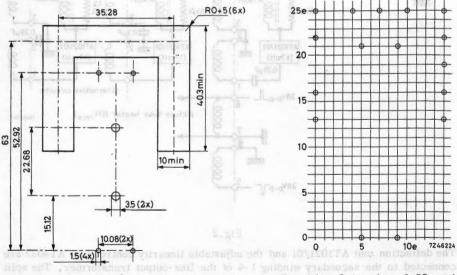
Fig.4 (e = 0.1 inch or 2.50 mm)
